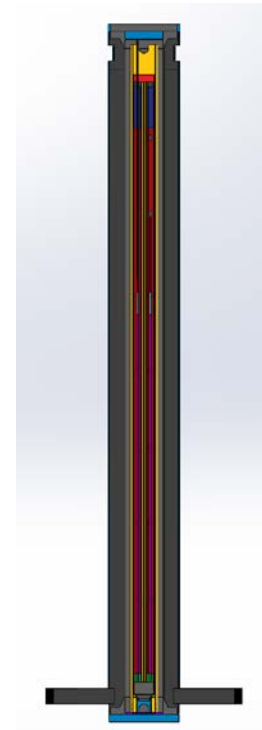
CAD geometry of DCS – axial cross-sectional view.
